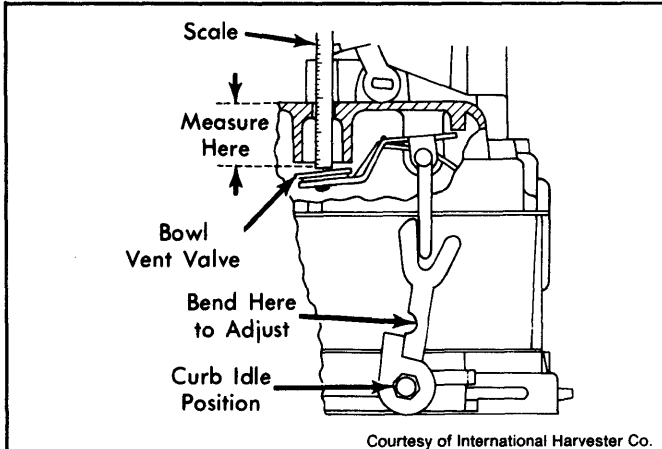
Adjusting Mechanical Bowl Vent Valve
